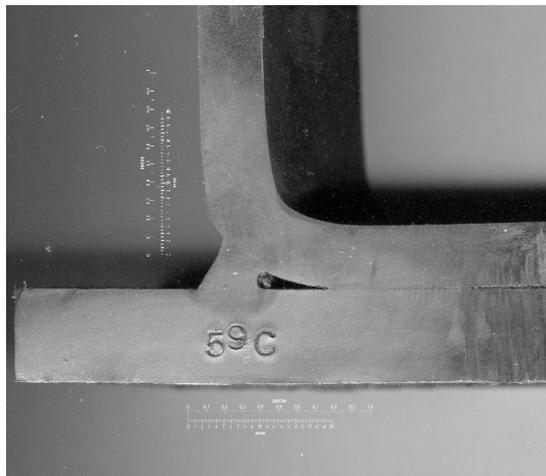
Scanned Image of Test Weld No. 59 Cross-section.
